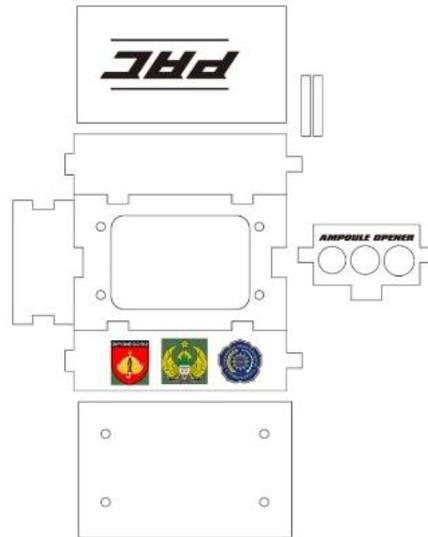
2D Prototype Design of PAC (Pocket Ampoule Cutter)
